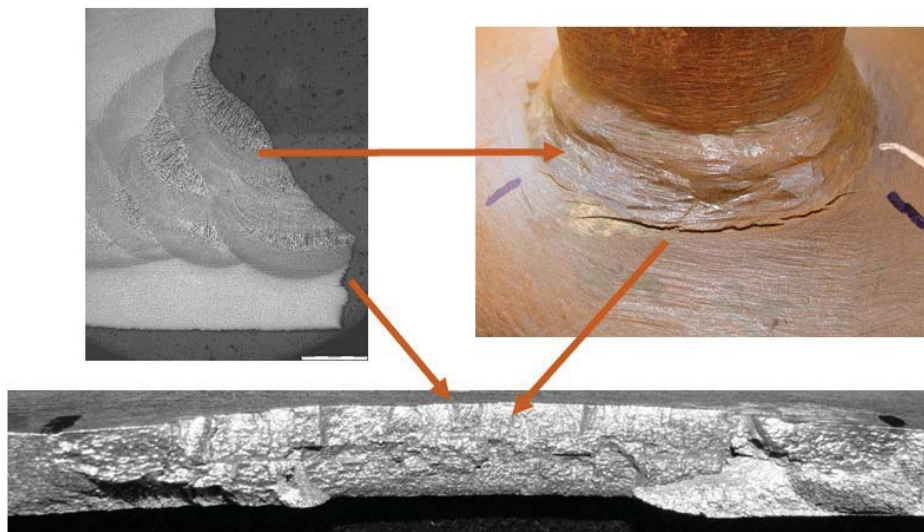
Photograph of nipple # 6-0249 illustrating that failure occurred at the weld toe after testing 243834 cycles.
